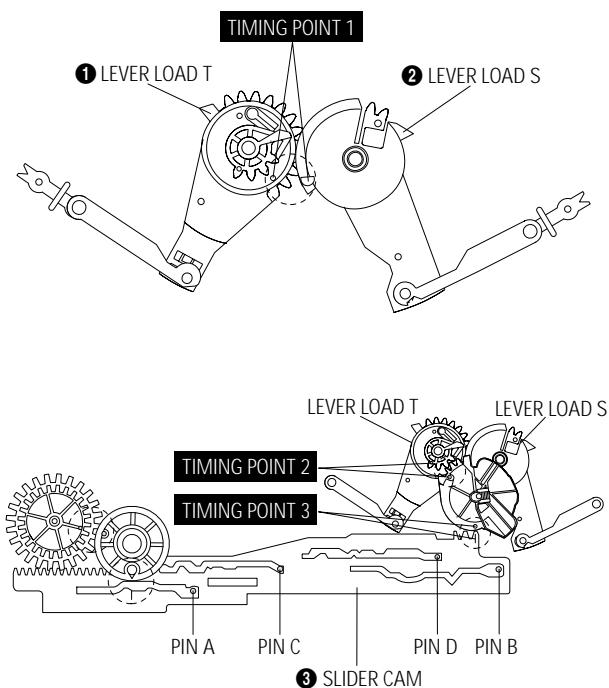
Gear Loading Drive, Slider Cam, Lever Load S, T Ass'y Assembly
